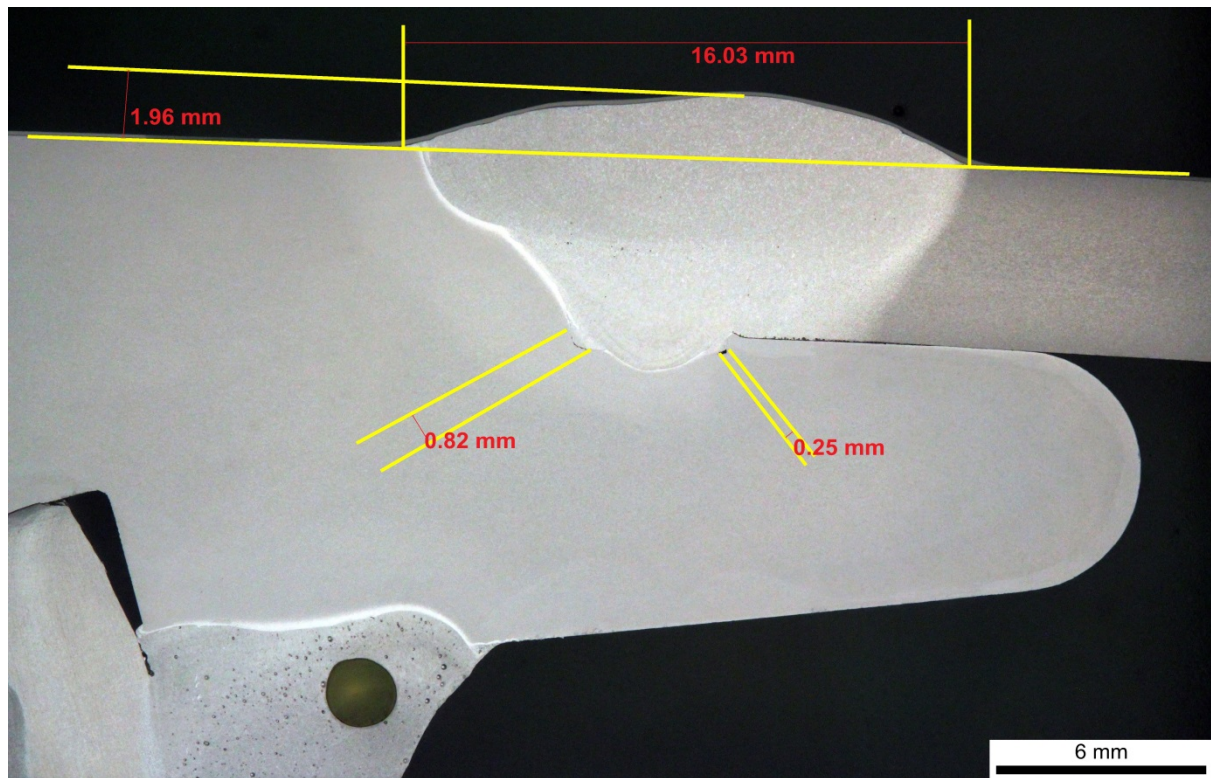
J3564 sample W07-08, slice 3, right hand side of Figure I81. Lack of side wall fusion defects present at weld root, but small height. Large gas pore in fillet weld joining bulkhead to extrusion band.
